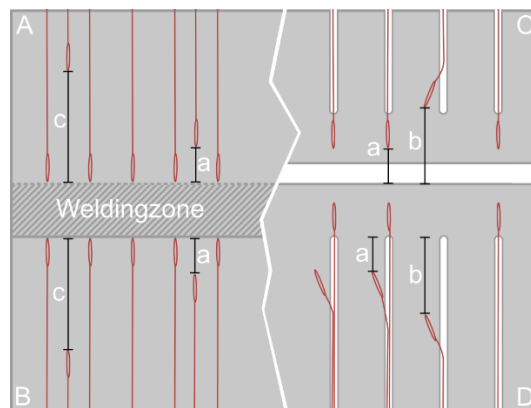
Schematics of thermocouple measuring points on TCs plates. In red: Thermocouples. Left side shows the welding plates while right side shows the plate below the welding samples.
